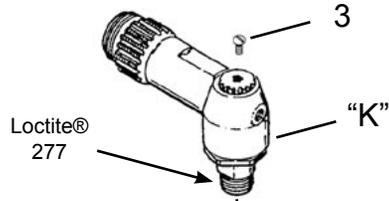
49096037 Hold-N-Drive Attachment
